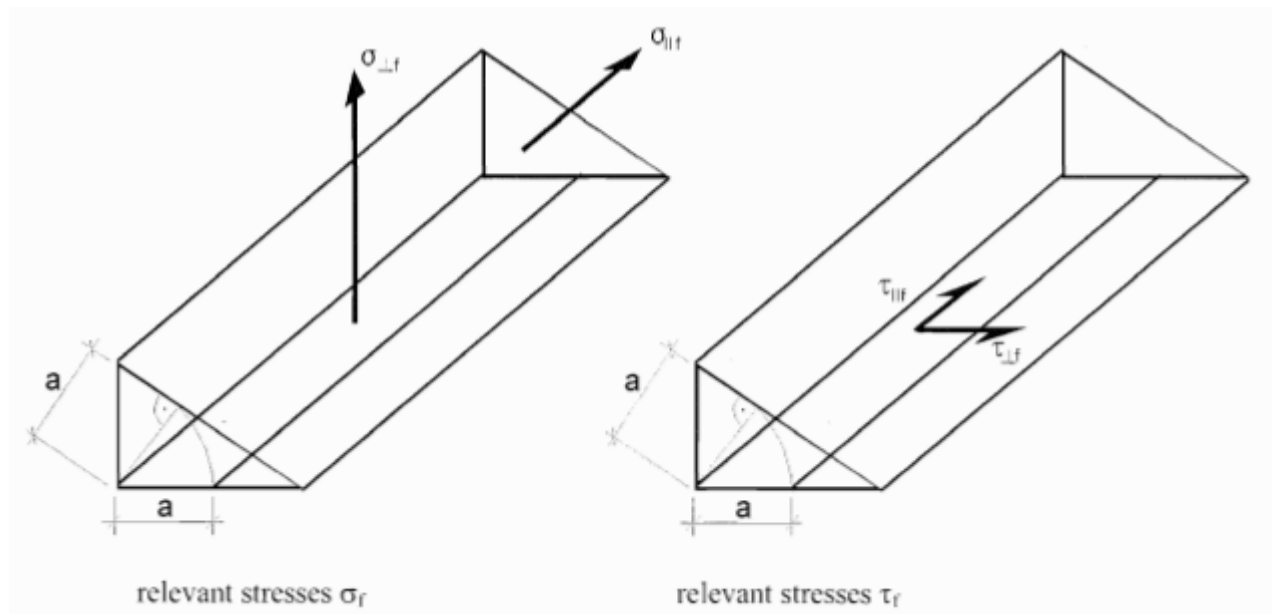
Relevant stresses in a fillet weld [8]
